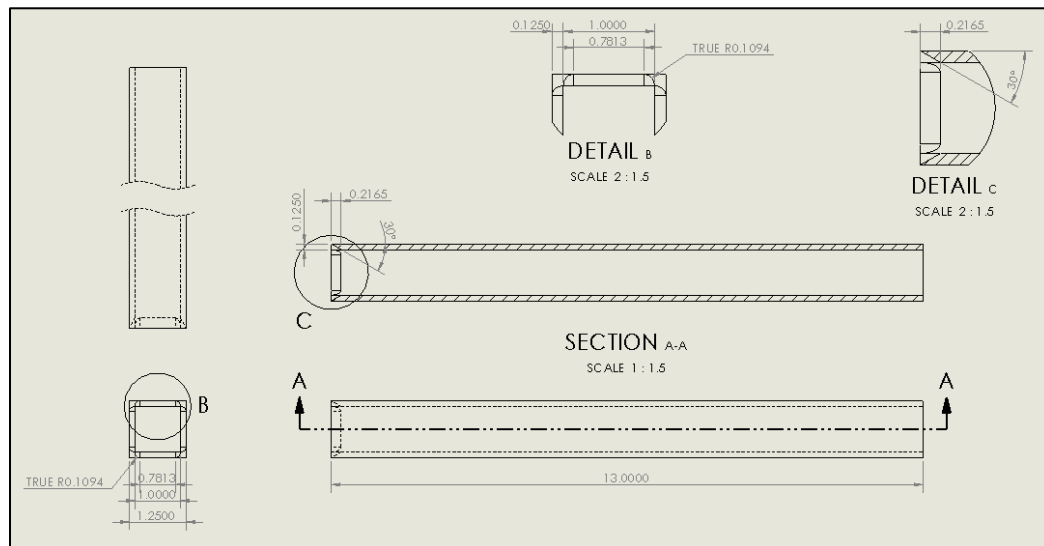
Engineering drawing of the test section made out of acrylic square tubing.
